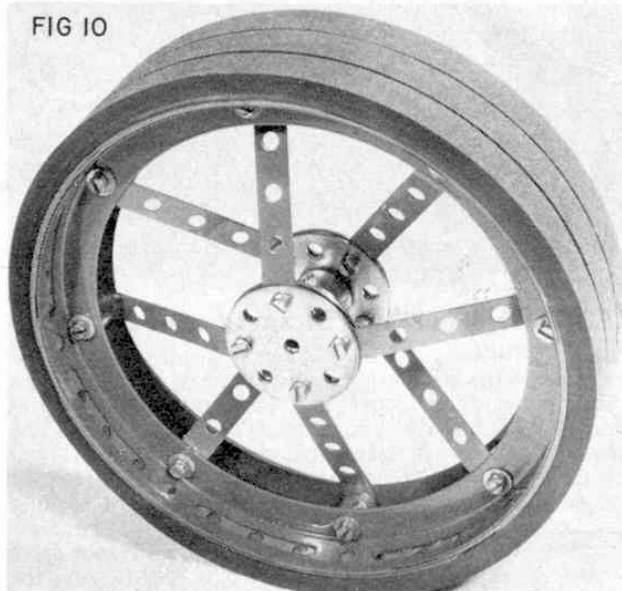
A partially-completed dished spoked wheel for a traction engine using $2\frac{1}{2}$ in. Narrow Strips for spokes. Eight-hole Wheel Discs are used to "sandwich" the spokes.
